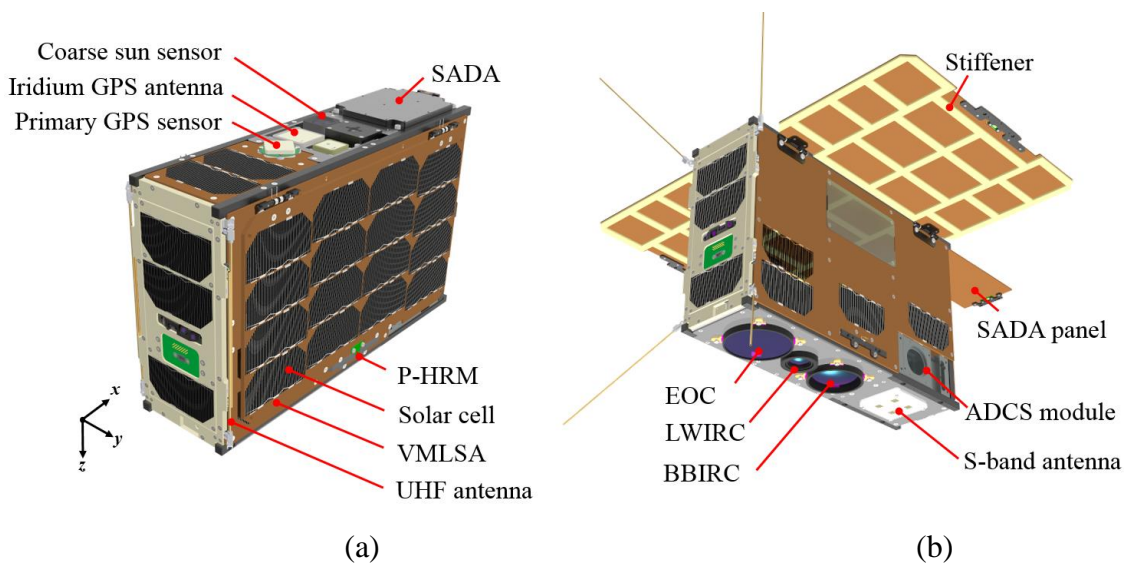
Mechanical Configuration of STEP Cube Lab-II: (a) Solar Panel Stowed and (b) Solar Panel Deployed.
